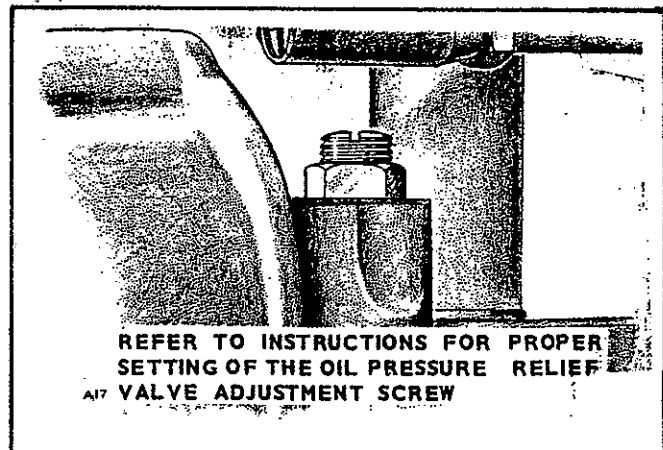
OIL PRESSURE RELIEF VALVE ADJUSTMENT
